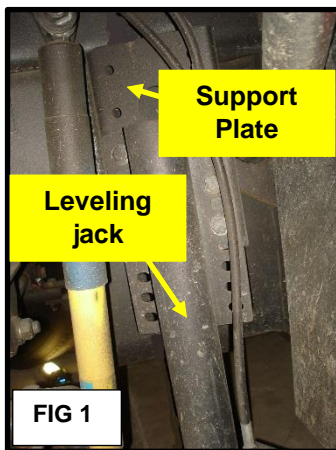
Driver Side Front Leveling jack mounted to existing support plate.
